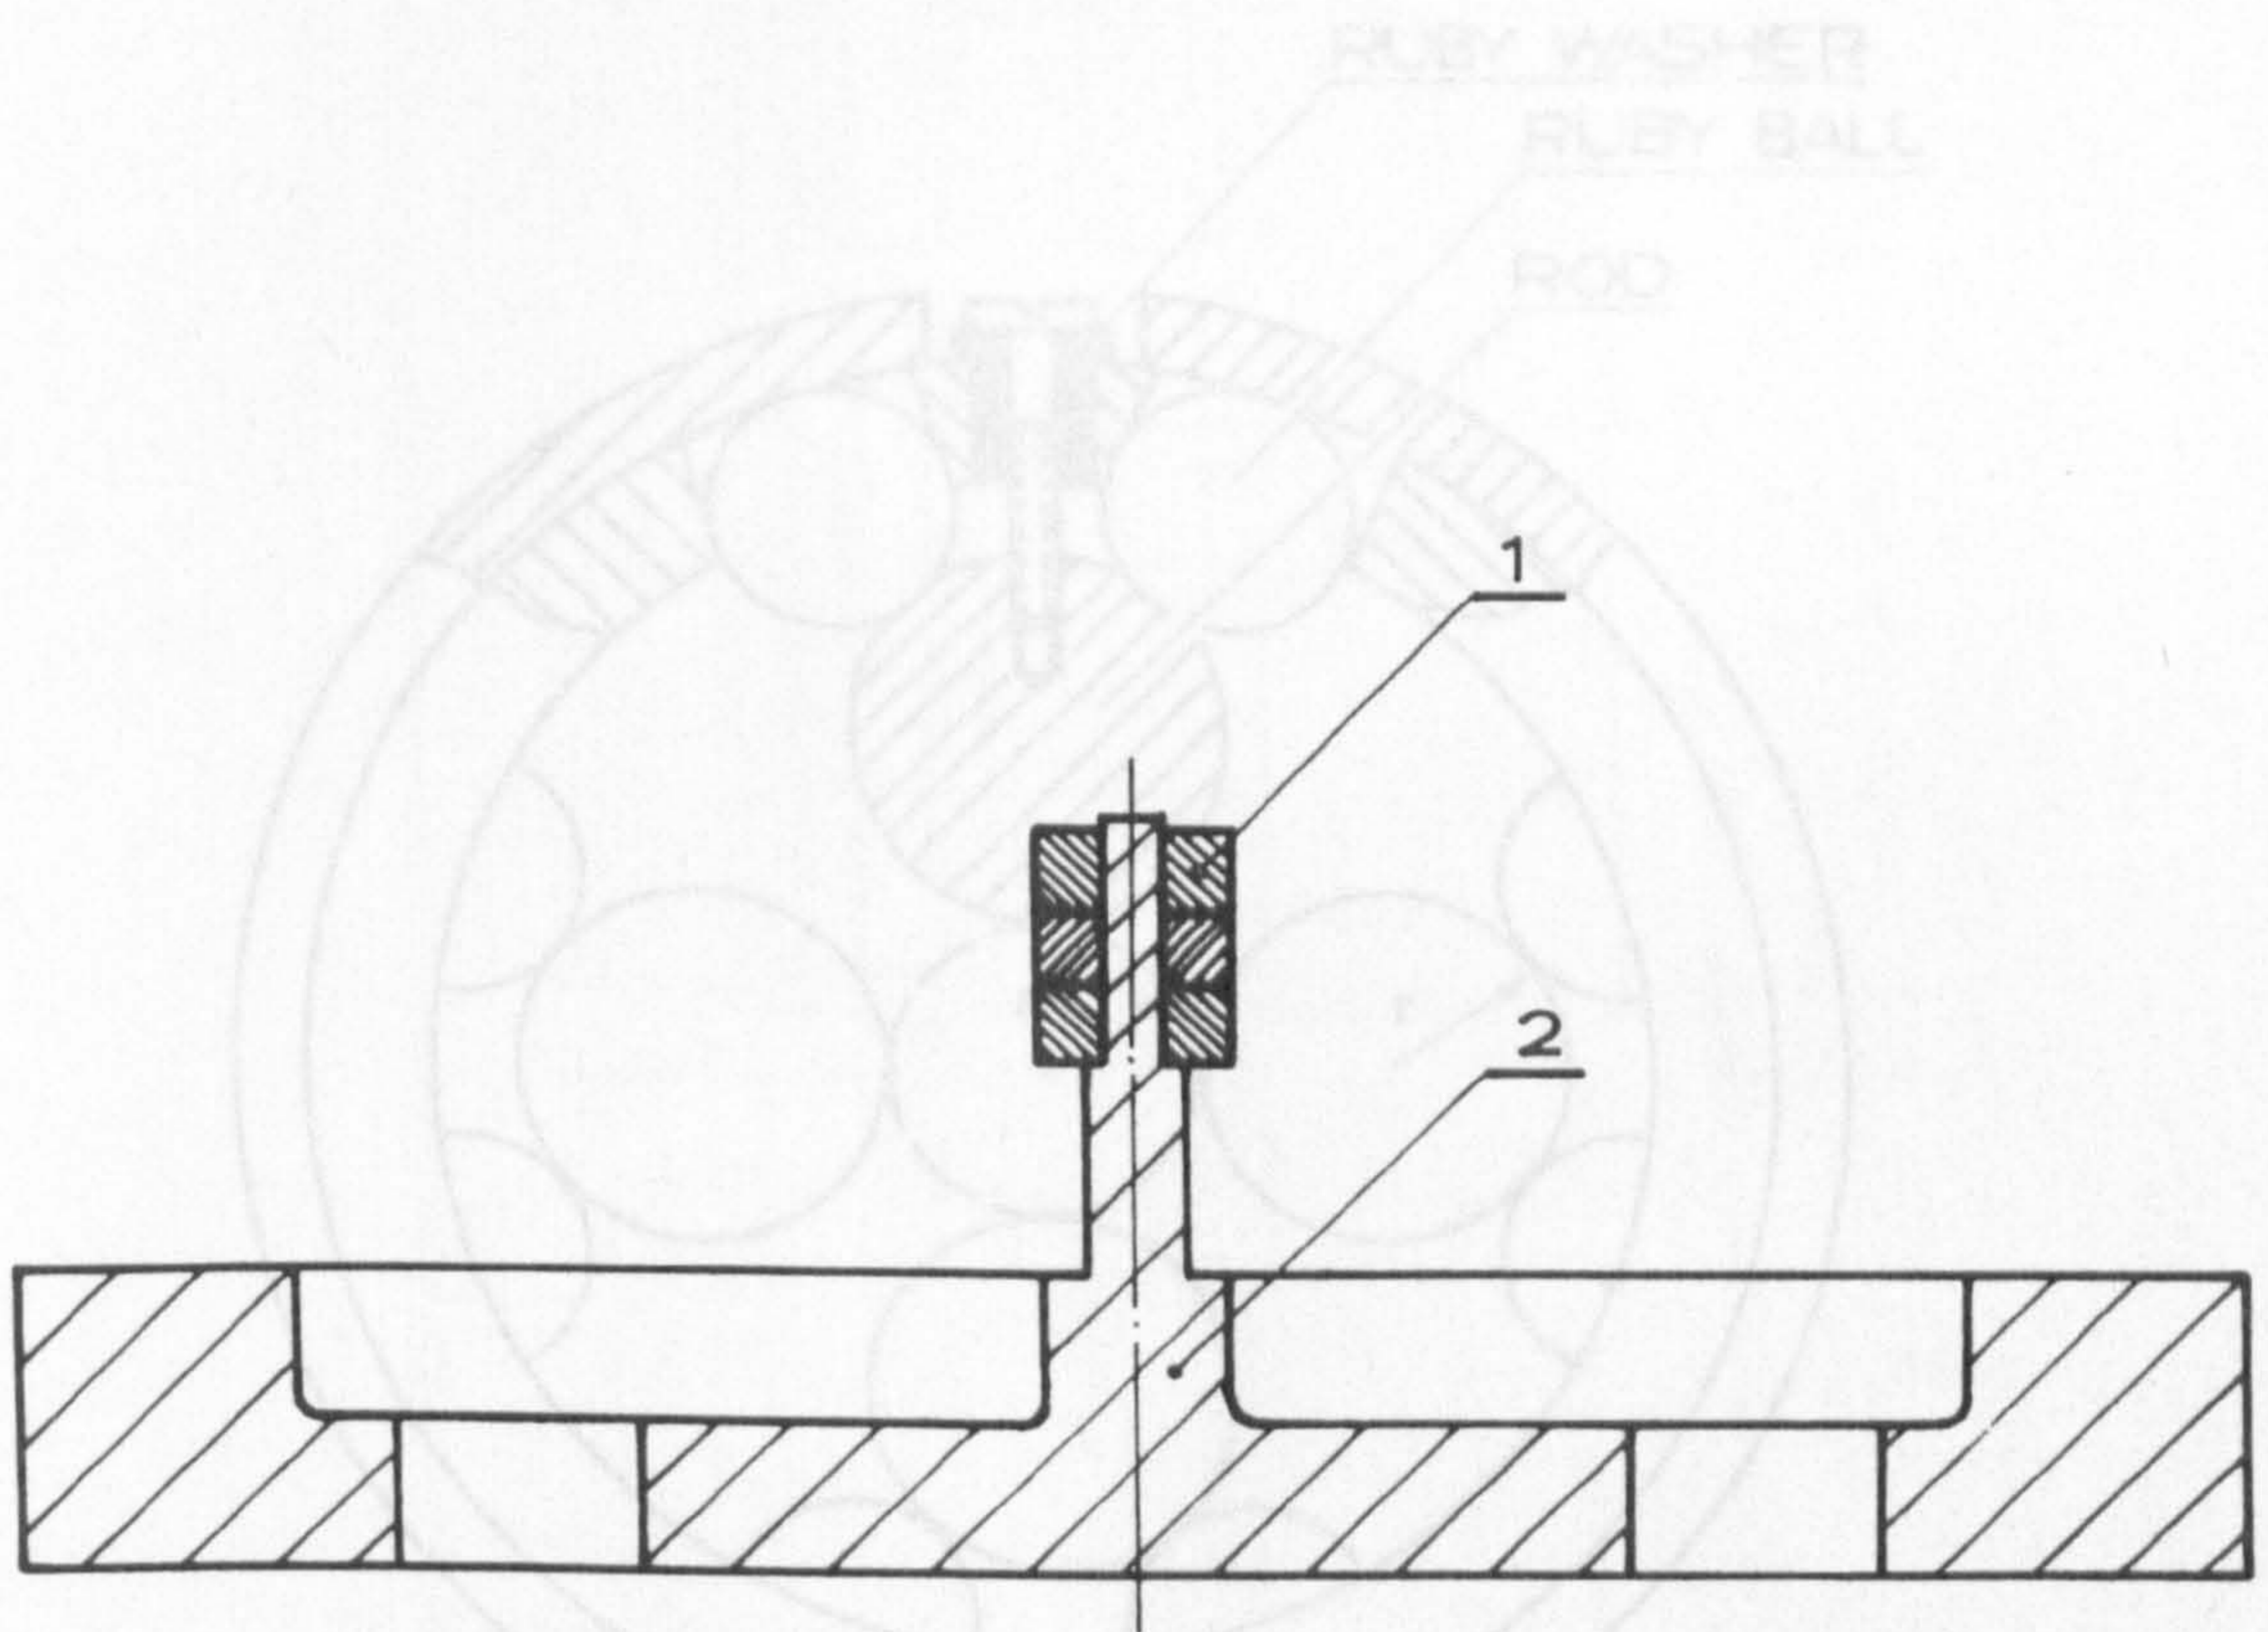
B. A JIG FOR ASSEMBLY OF THE NIER SOURCE.
